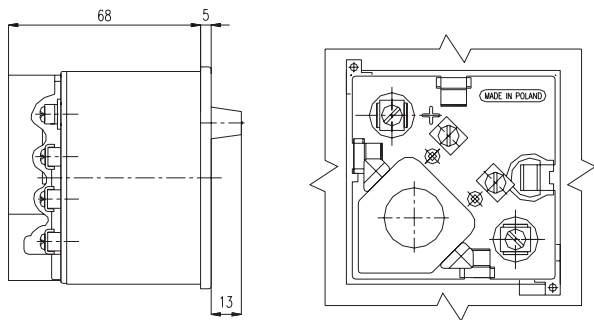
Way of the EP27 voltmeter assembly on the panel.
